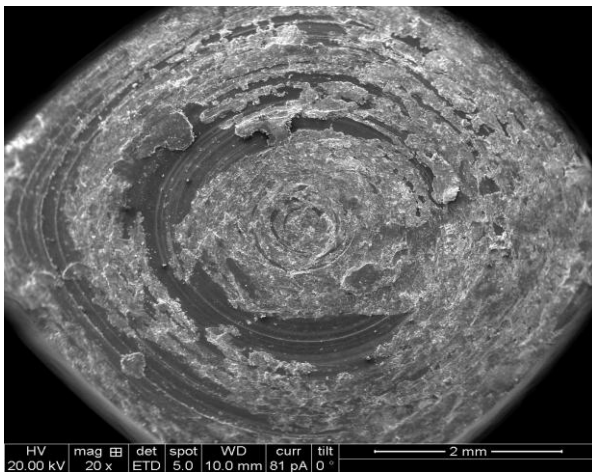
Fracture surface analysis of Tensile tested specimen at 20X
